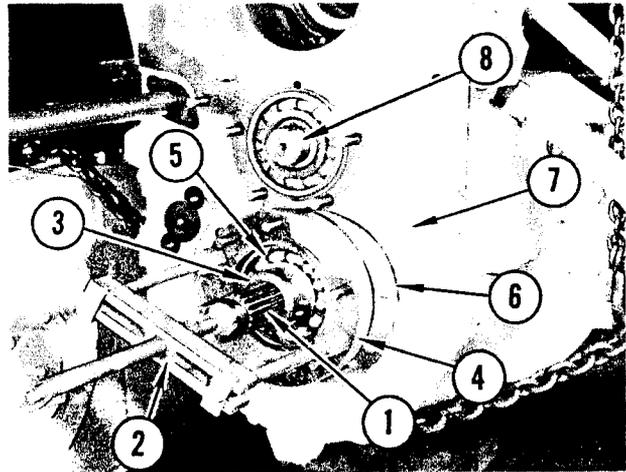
LOWER SHAFT ADAPTER REMOVAL
